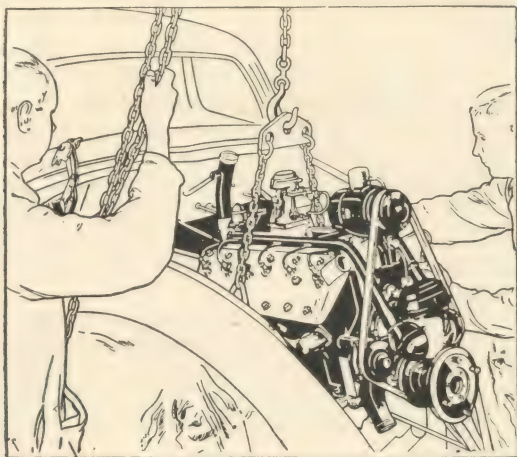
LIFTING A LARGE ENGINE OUT OF CHASSIS
